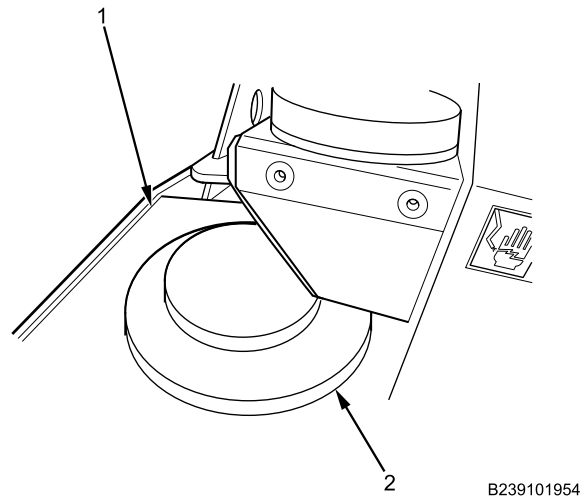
Overpressure Relief Valve Shield Assembly Mounting.
